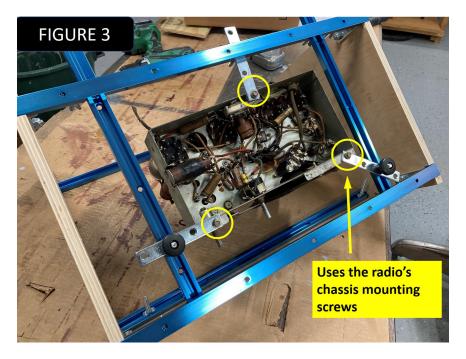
shows an example of a smaller, shorter chassis installed in the cradle, and it's a case where there are only 3 chassis mounting holes with one in the center of the chassis at its rear. In this case, some longer flat mounting plates are used and a T-bolt in the top extrusion rail is used as well as the 2 side rails to mount the chassis. This adjustable arrangement is very flexible and can be adapted to just about any mounting hole pattern.
